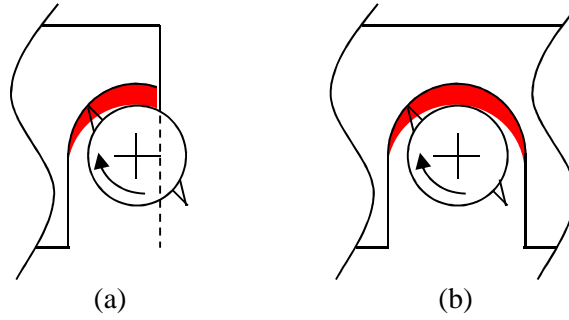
Top view of milling tool in a (a) conventional milling and (b) slot milling process.
